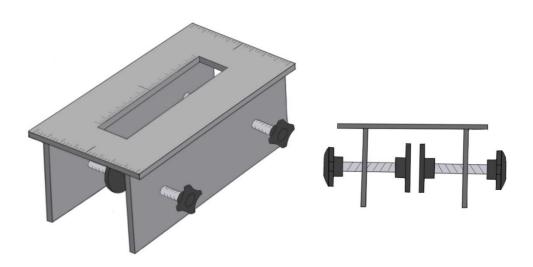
Flush Bolt Jig with Screw Claps and Measurement Indicators
